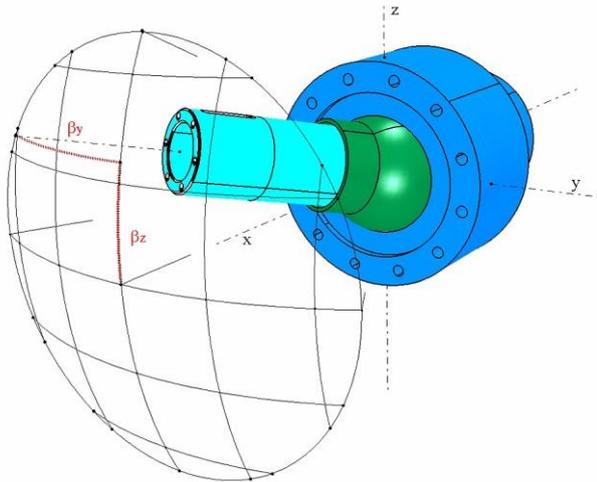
Magnetic Gearing Actuator with Angular Displacement of the Output Shaft, Mode 2.
